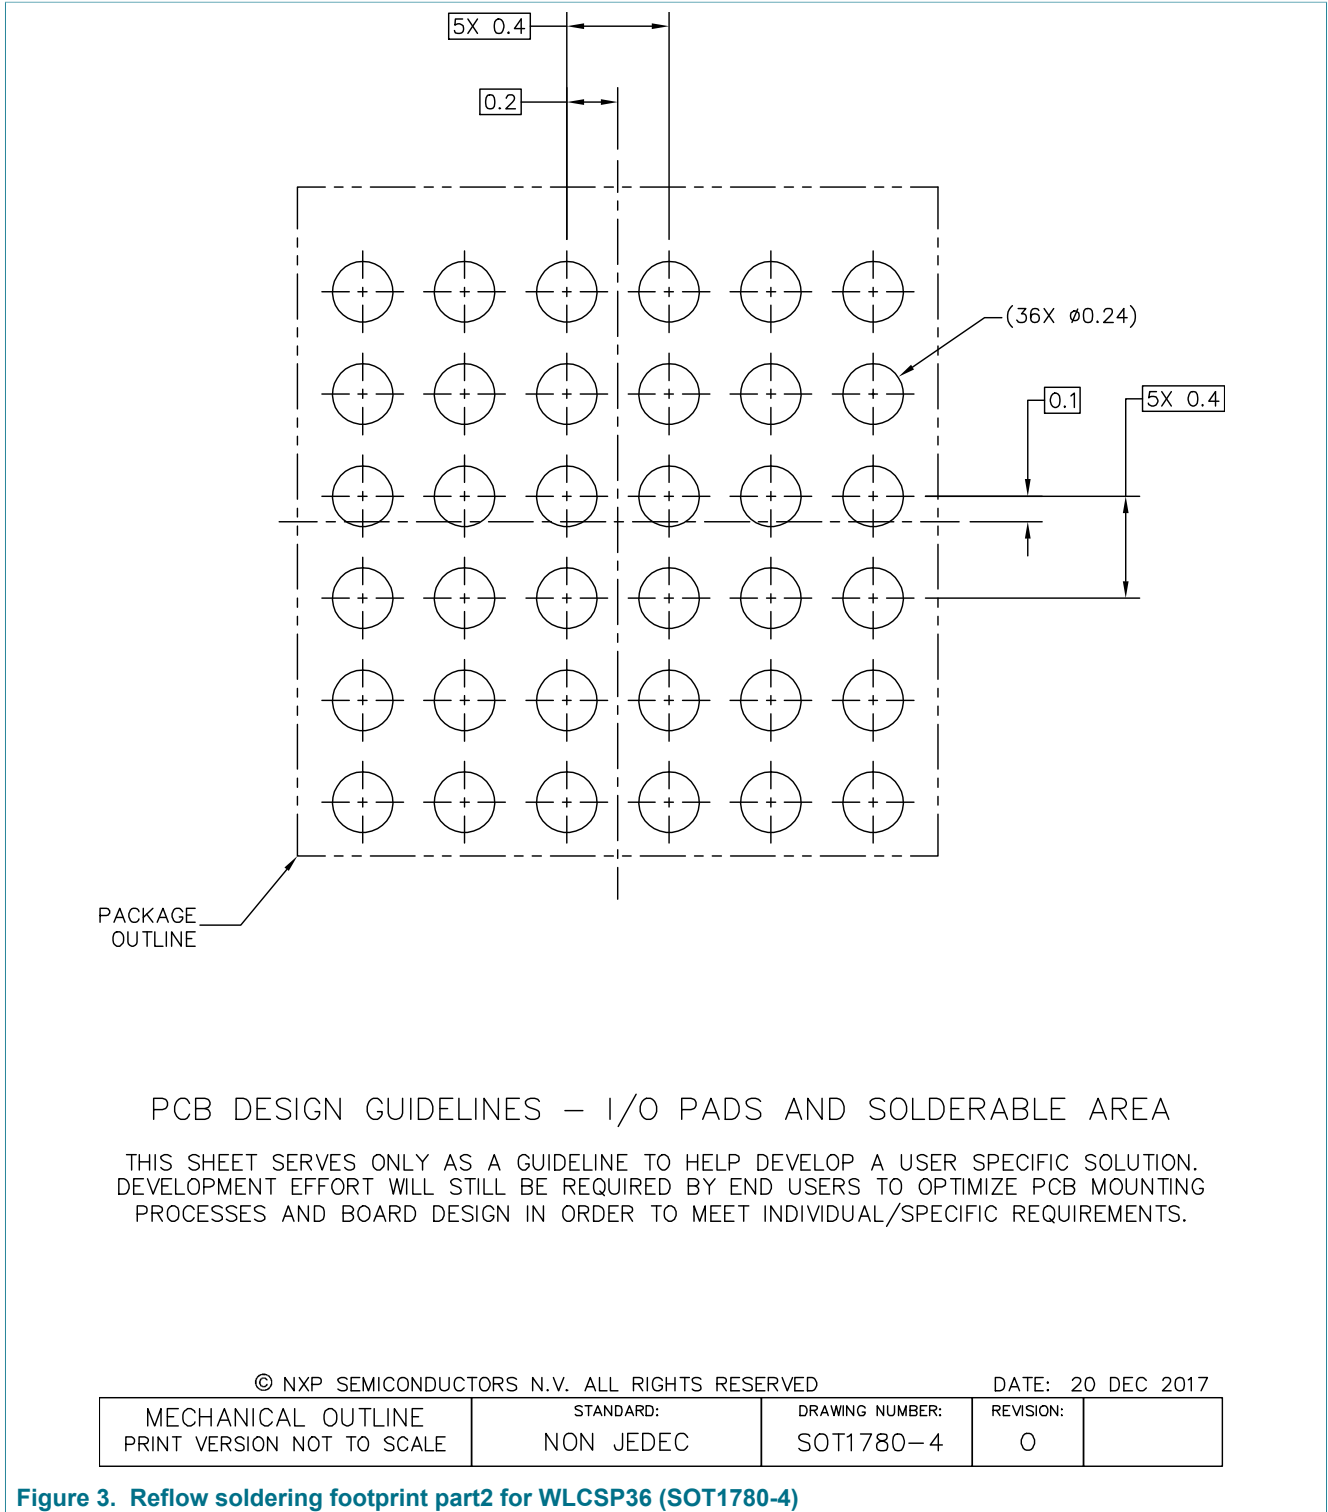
Reflow soldering footprint part2 for WLCSP36 (SOT1780-4)
